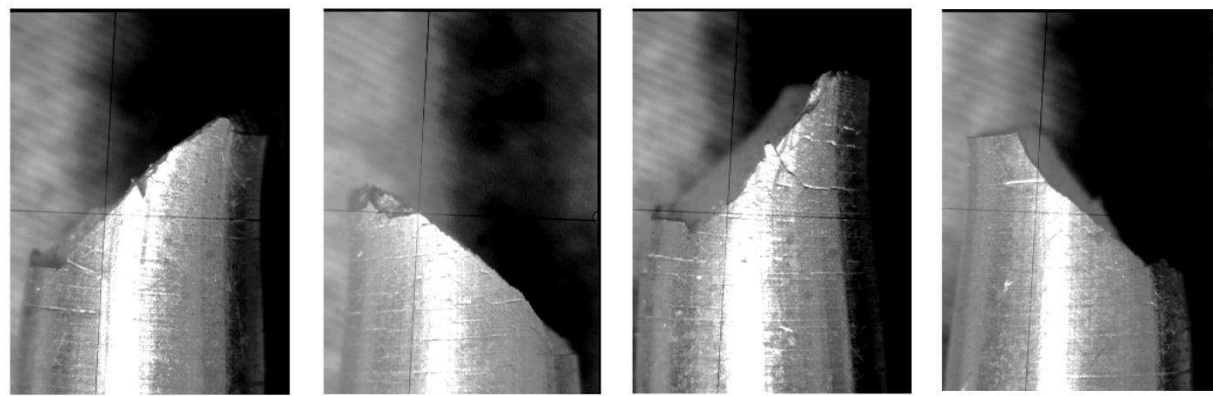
Fracture angles of specimen S2; a) & b) side A; c) & d) side B
